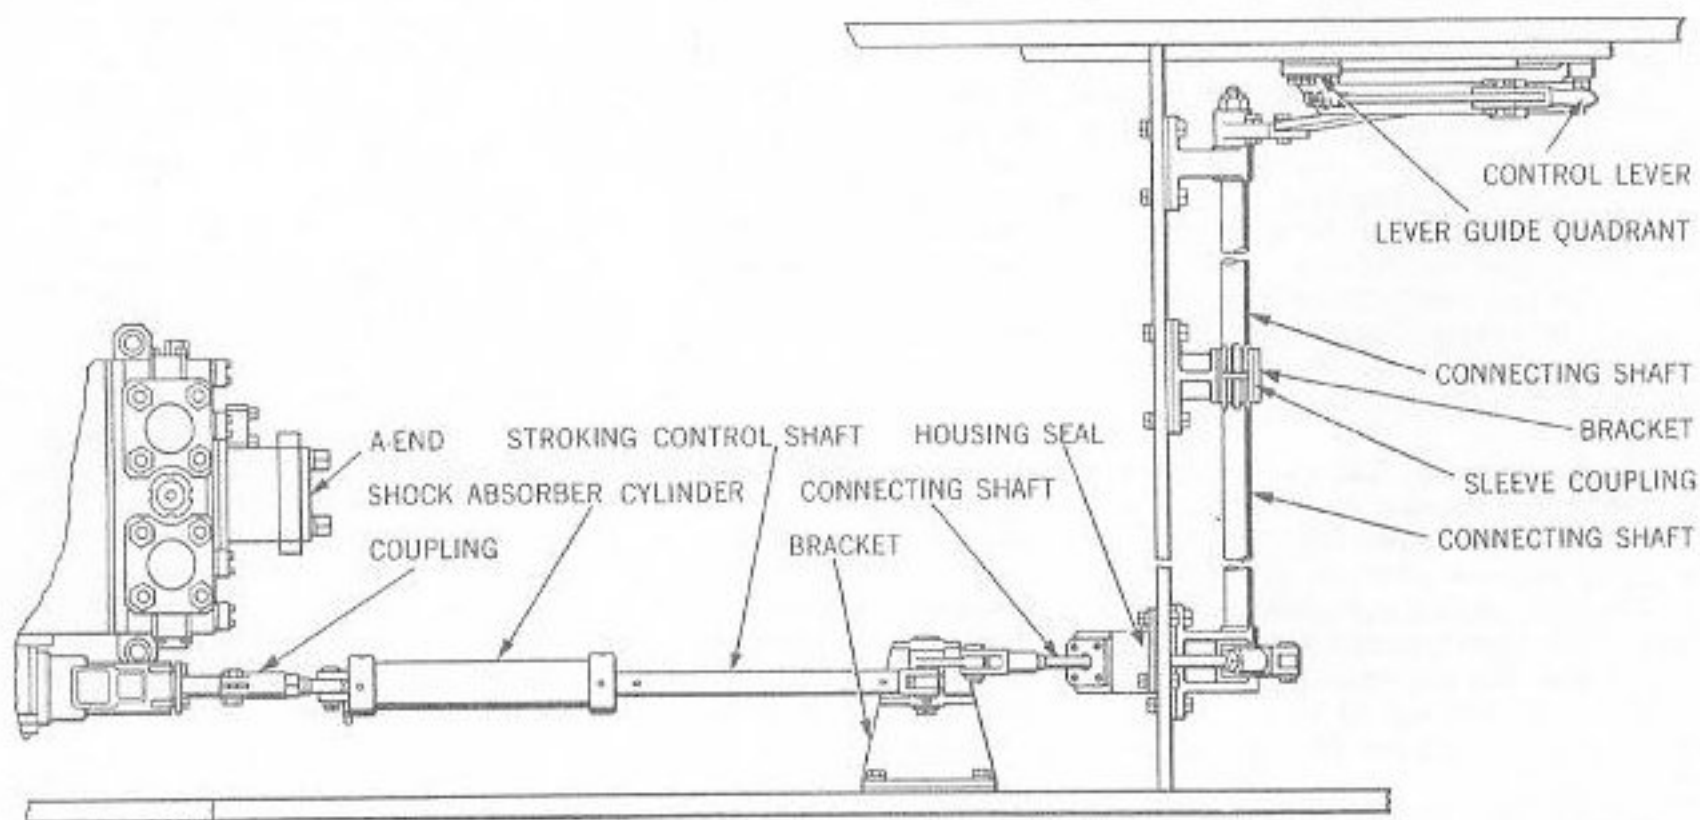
Hand Control Gear, Center Rammer, Plan View
